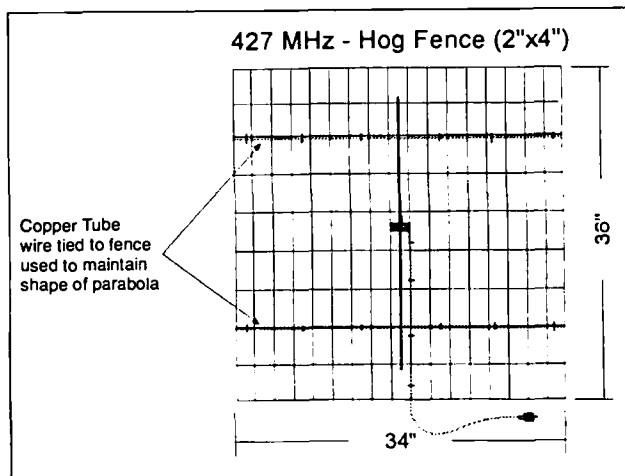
Final assembly of component parts of the Hog Fence antenna. The copper tubing is wire tied to the hog fence reflector to maintain parabolic shape.
